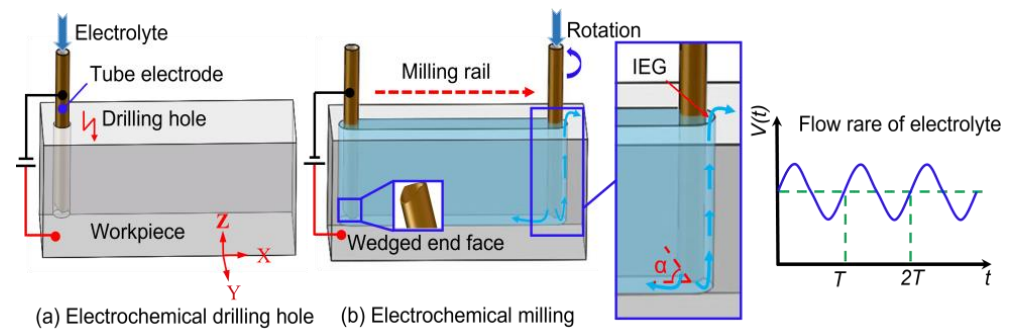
The schematic diagram of EC-milling of DNG with a wedged end face tube electrode. (a) Electrochemical drilling hole, (b) Electrochemical milling.
